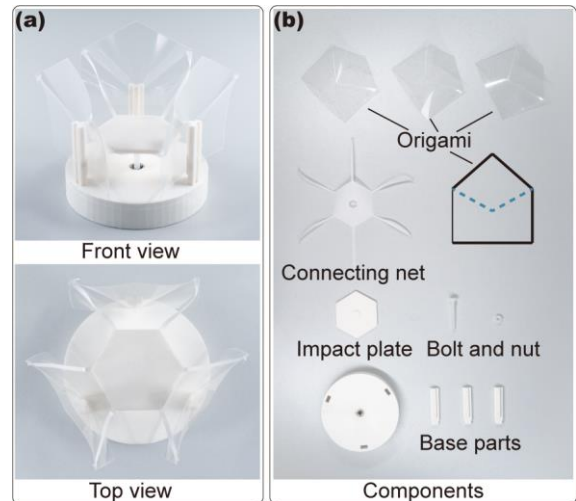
Schematic of the proposed ultrafast gripper. (a) Front view and top view of the prototyped gripper. (b) Components of the gripper.
